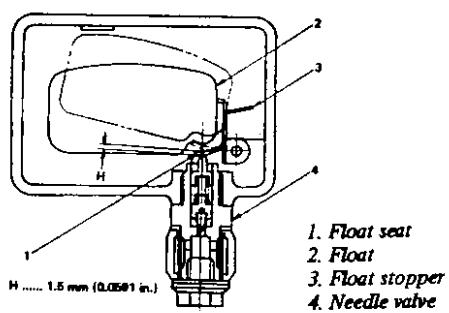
Adjusting the fuel level - DAK340 carburettor
